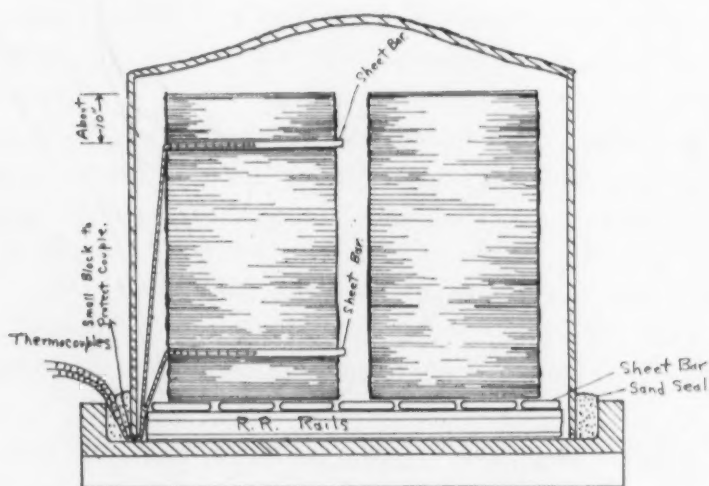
Cross Section of Annealing Box Showing Method and Position of Inserting Thermocouples.
